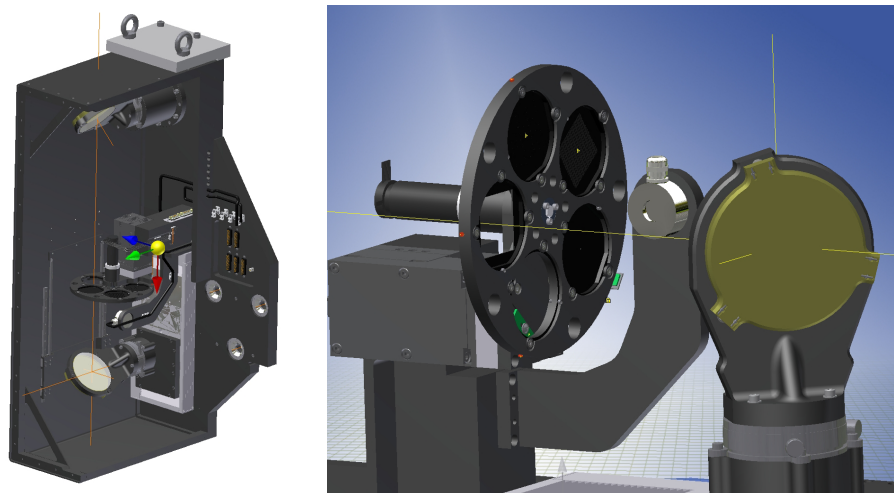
Left: CAD view of the CU front part, which includes the fold mirror, the mask wheel, and the pick-up movable mirror all mounted to a common plate. Right; Detailed CAD view of the CU mask wheel which has 5 ports to hold the calibration masks. Also shown is a calibrated photodiode that can be illuminated by the CU beam to flux-calibrate the instrument.
